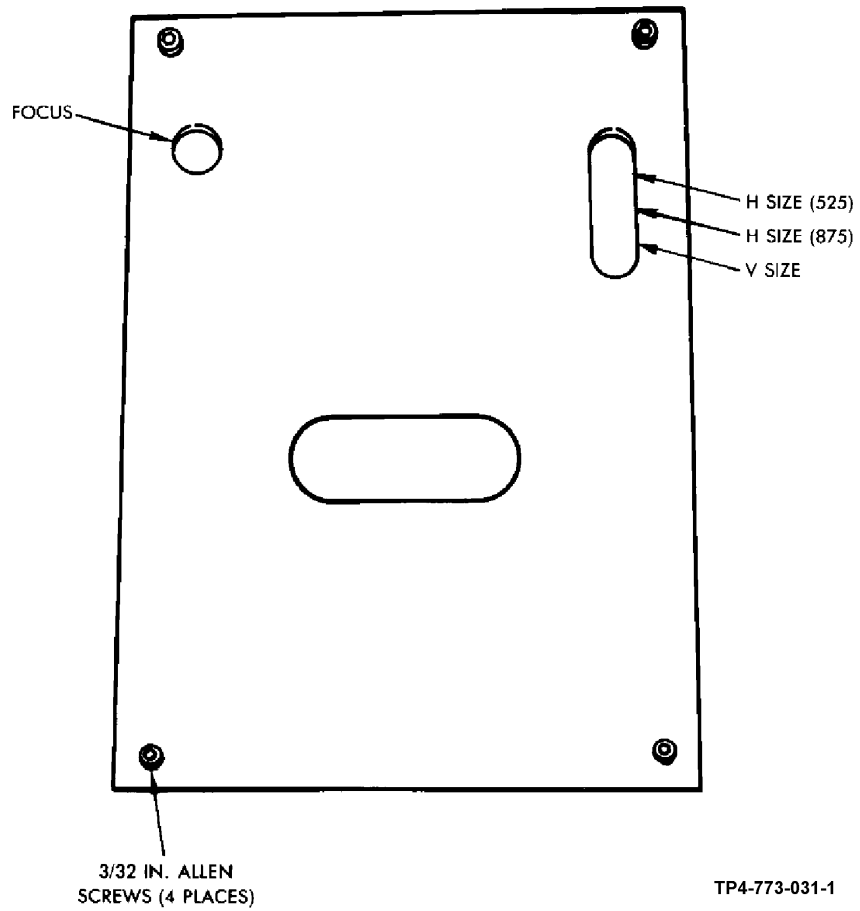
Control Panel Assembly Adjustment Cover Assembly 13073117
